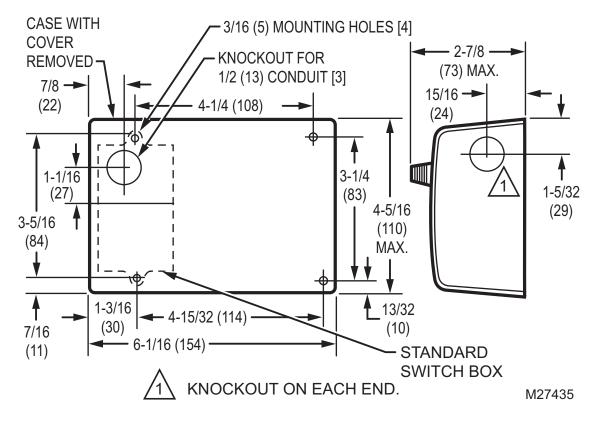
T631 installation dimensions, in in. (mm shown in brackets)
